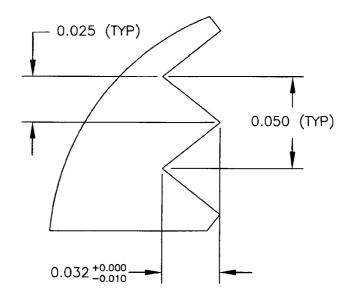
DETAIL A: SLOT DETAIL SCALE 2:1 VIEW ROTATED
